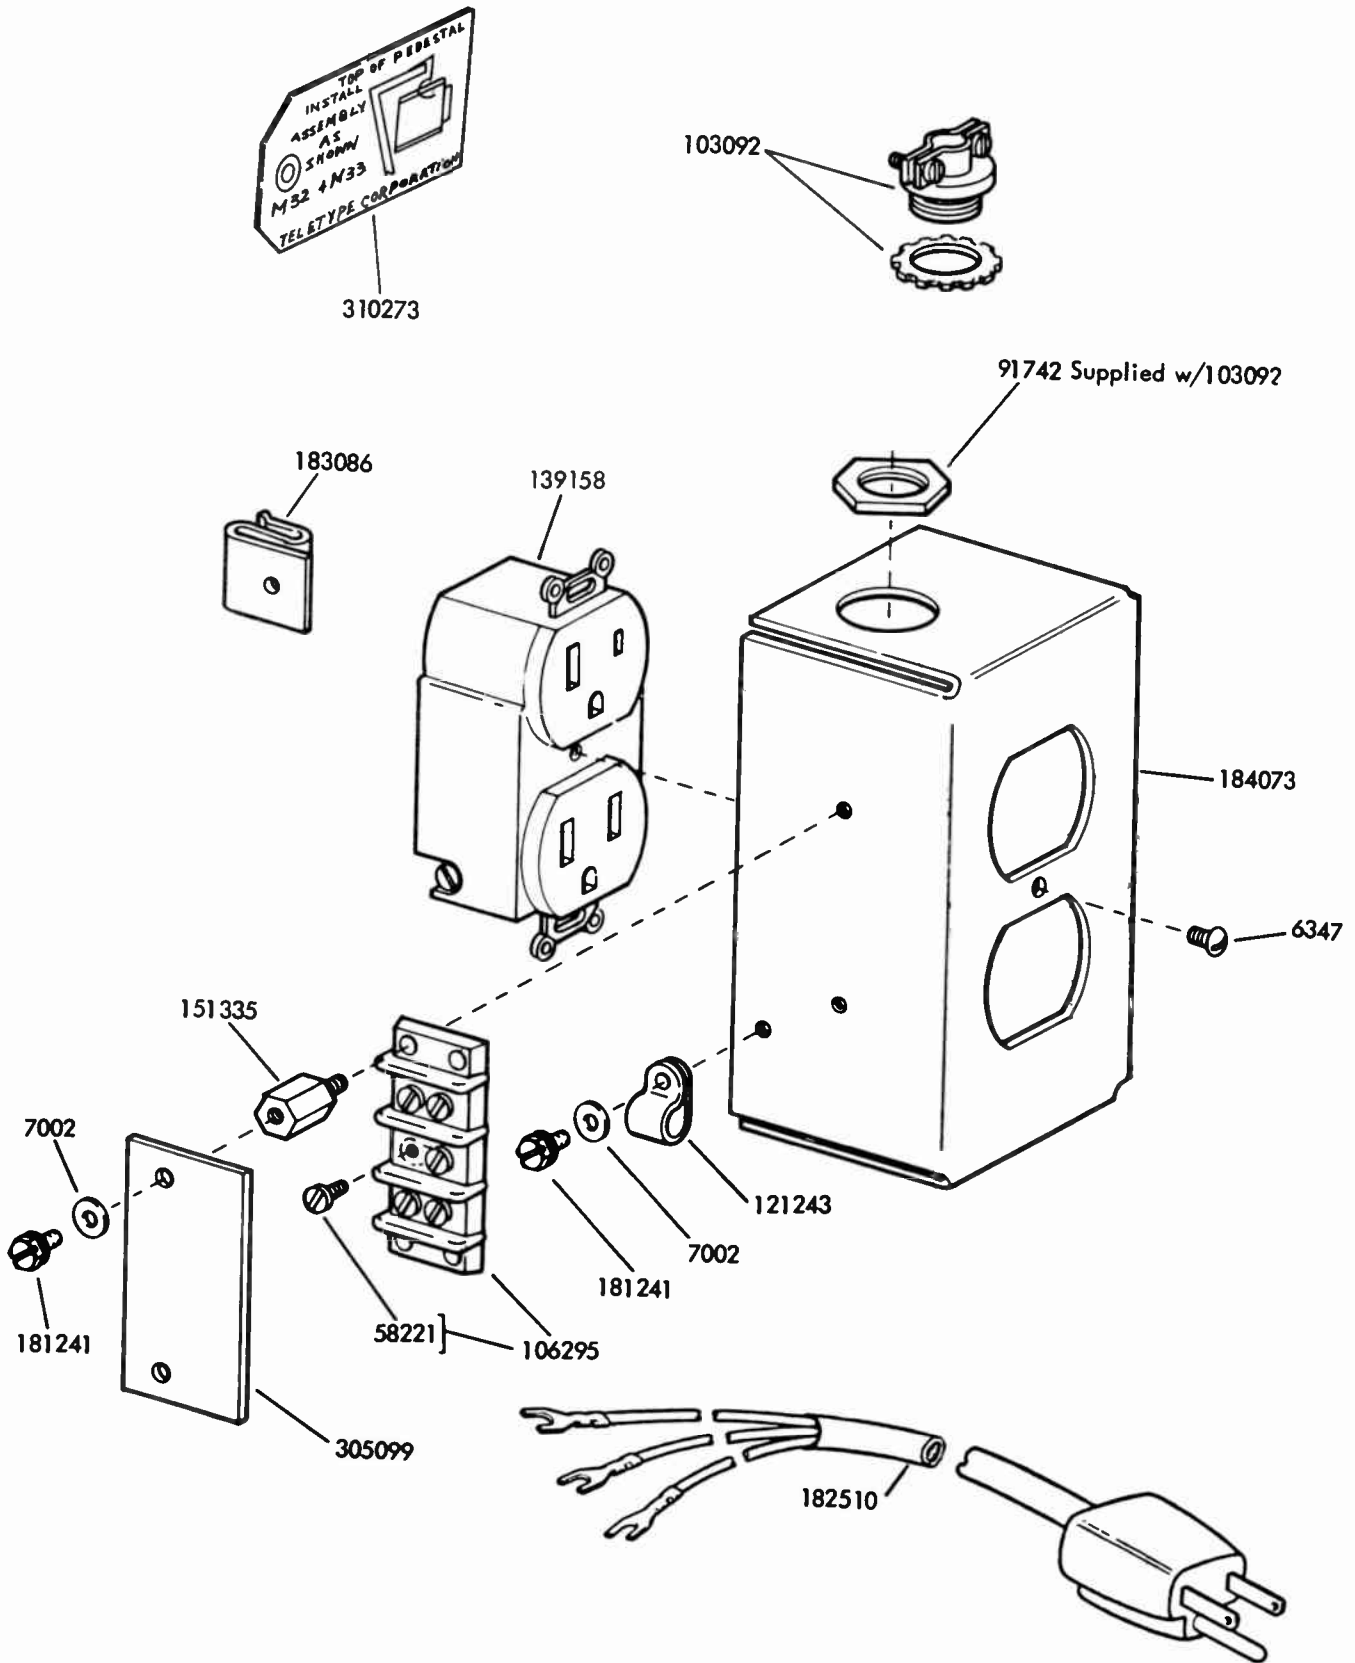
184074 OUTLET BOX ASSEMBLY
